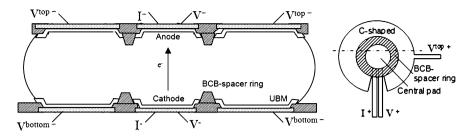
Cross section and *top view* of modified bump 4-point measurement with concentric side-bump design
